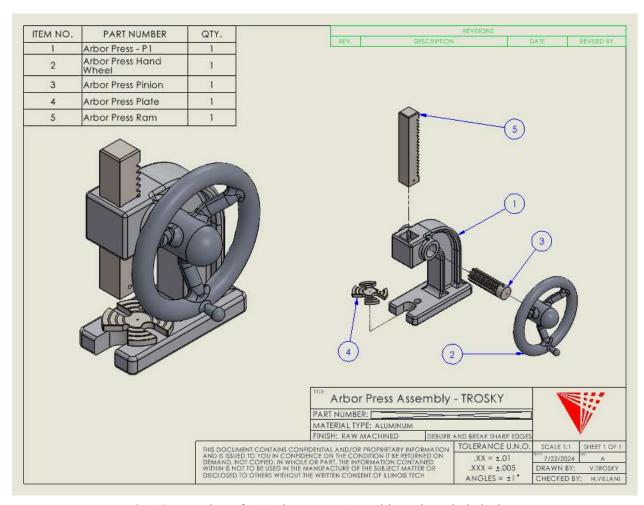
Drawing of P1 Arbor Press Assembly and Exploded View
